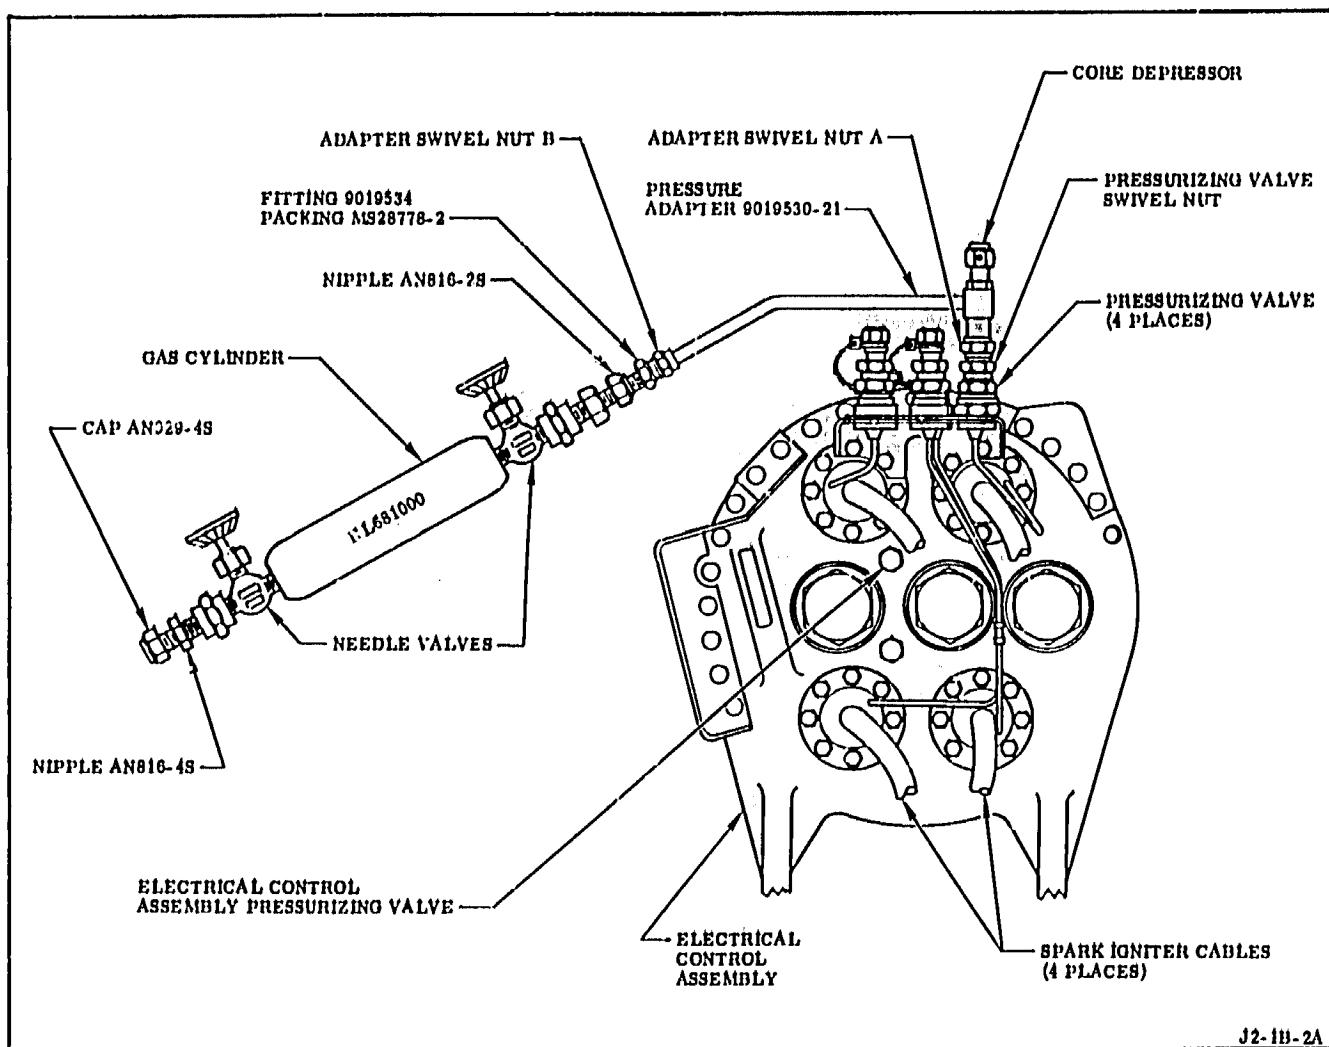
Sampling Pressurizing Gas in Spark Igniter Cables and Electrical Control Assembly
